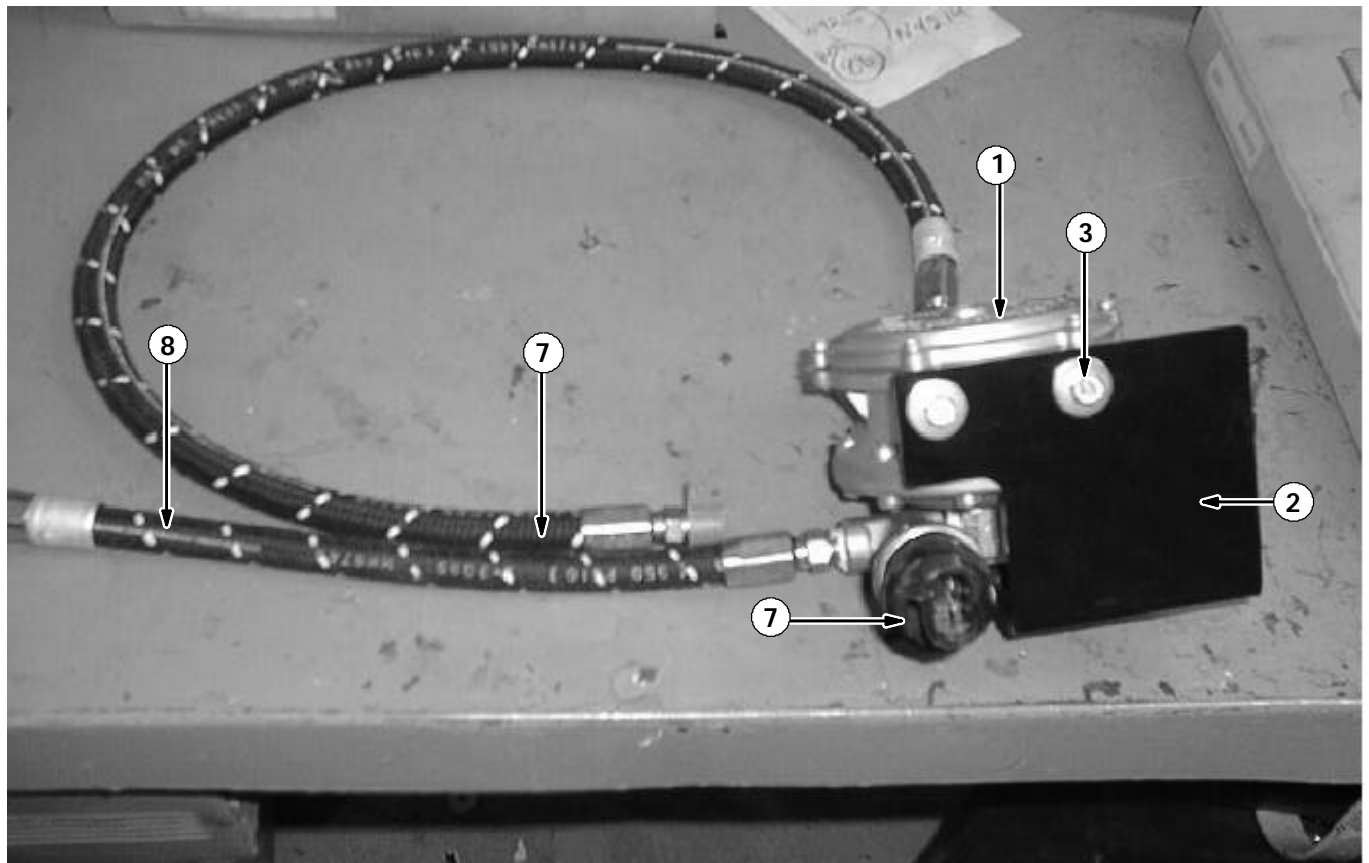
NEW FUELOCK FILTER ASSEMBLY
